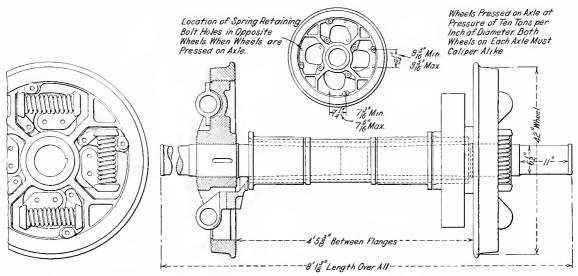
Quill and Spring Driving Arrangement for New York, New Haven & Hartford Motor Shown in Fig. 2561.
